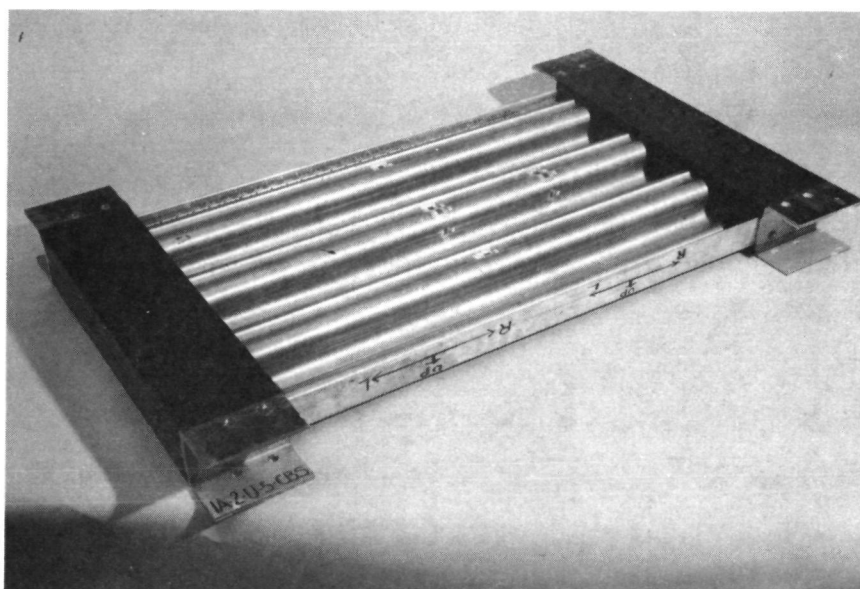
7 : FLUTED SINGLE SHEET LOCAL BUCKLING SPECIMEN
